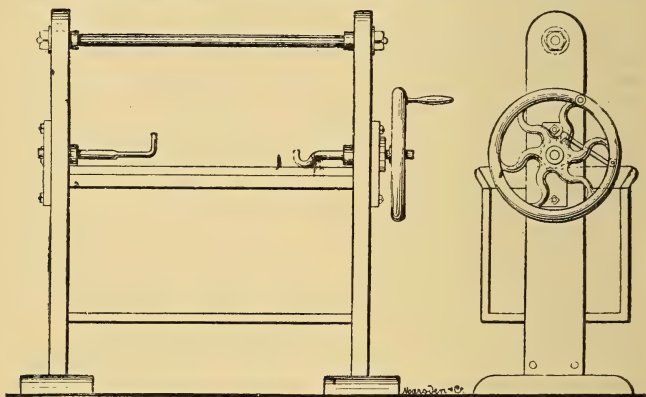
HAND-POWER HANK-SIZEING MACHINE; FRONT AND END VIEW.
